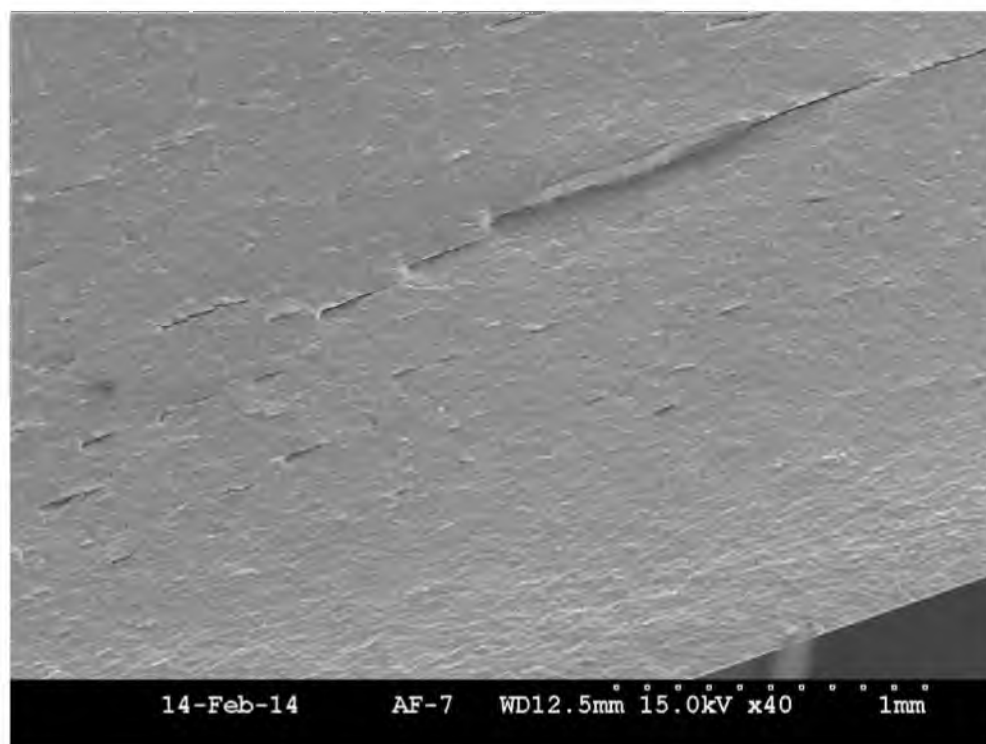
GT270-7 40x Image of Secondary Cracks Near End of Fatigue Crack
